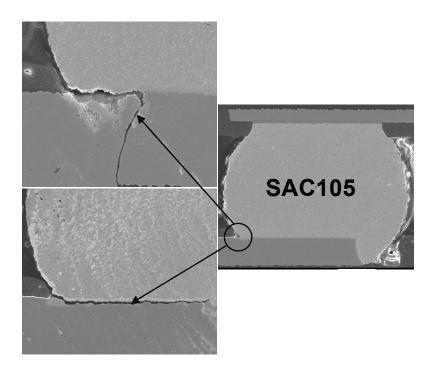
Failure Modes observed in SAC105 Solder Joints
